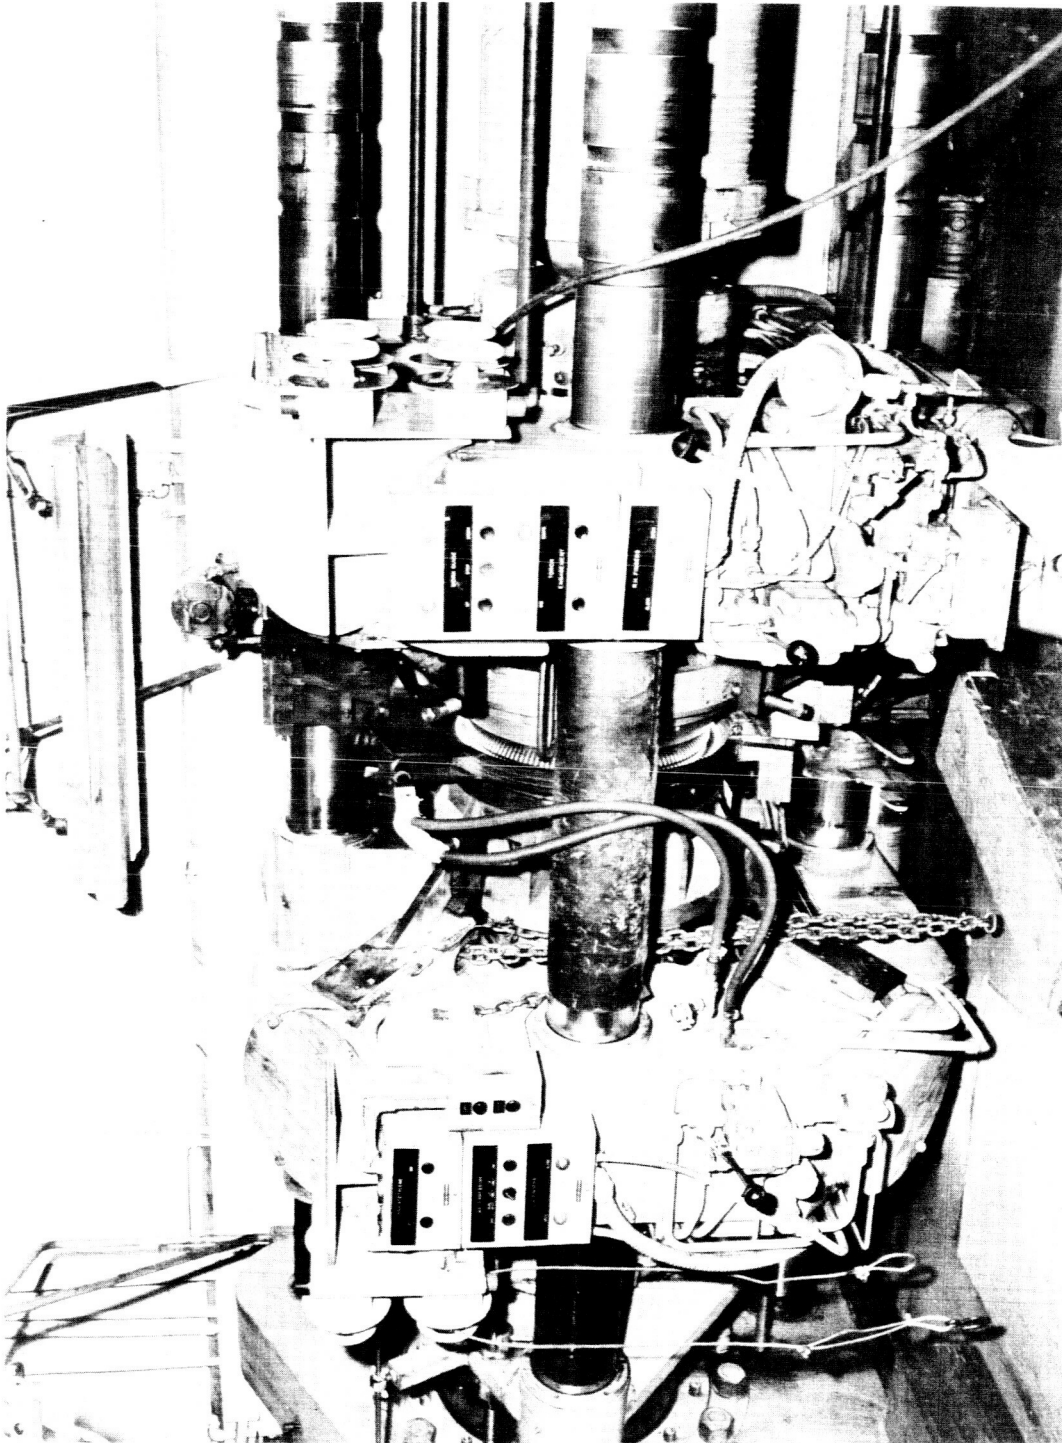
APPARATUS FOR GAS PRESSURE WELDING (REF. 77)
